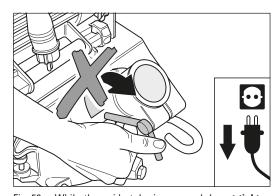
While the guide tube is removed do not tighten the wing nut at the machine housing!
